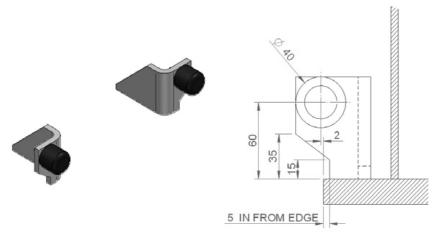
Single Girder 4 & 8 Fall Traverse End Stops
